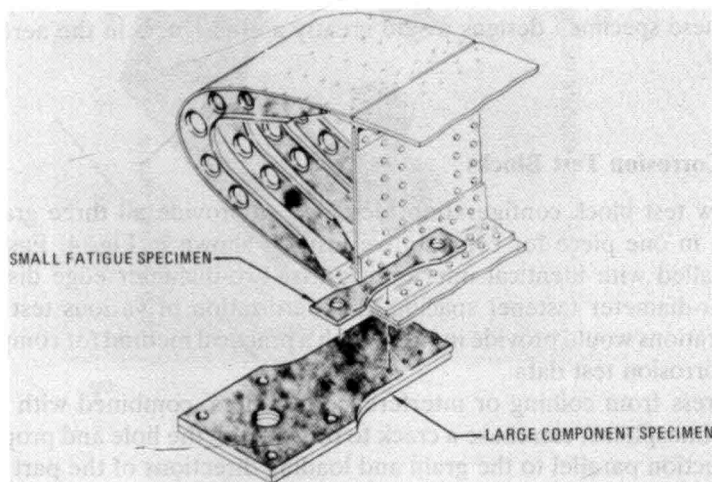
Application of test specimens to a full-scale aircraft structure.
